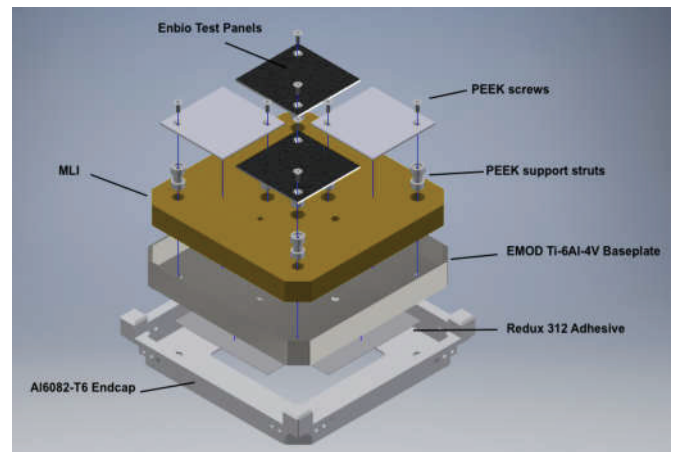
Exploded view of the EMOD Thermal Coupon Assembly.
